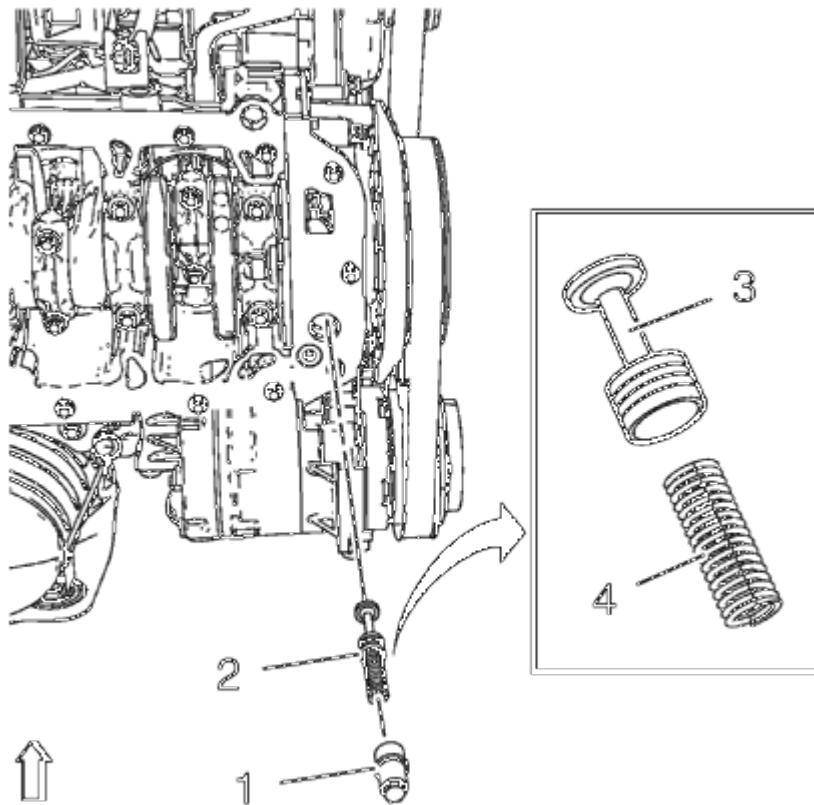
Engine Oil Pressure Relief Valve Assembly
